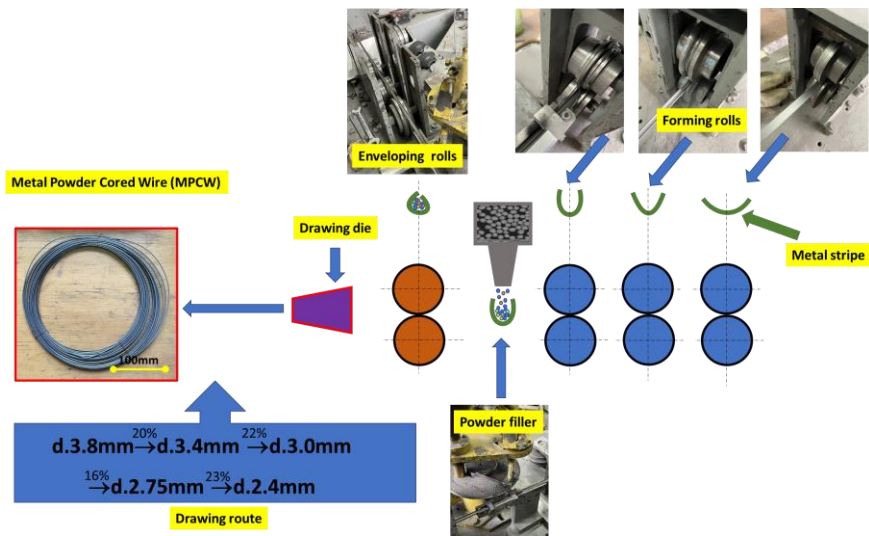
Scheme of the metal powder cored wire manufacturing
